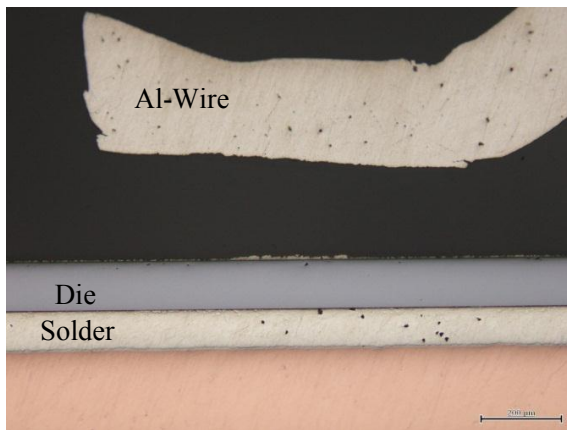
Optical image of the crack using Aluminum wire with solder die attach after 21,800 PCT
